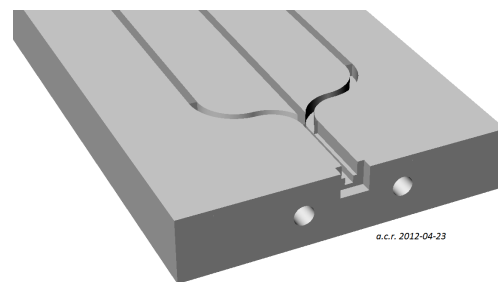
a scintillator bar machined to host three WLS fibers, the silicon photomultiplier and the carrier printed circuit board (PCB)
